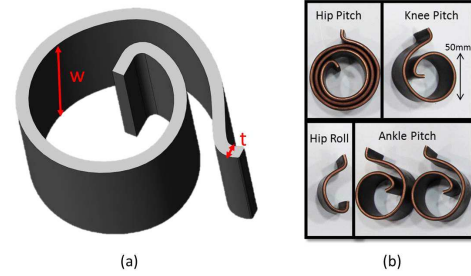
Schematic diagram showing spiral spring dimensions (a) and photographs of the spring samples.
